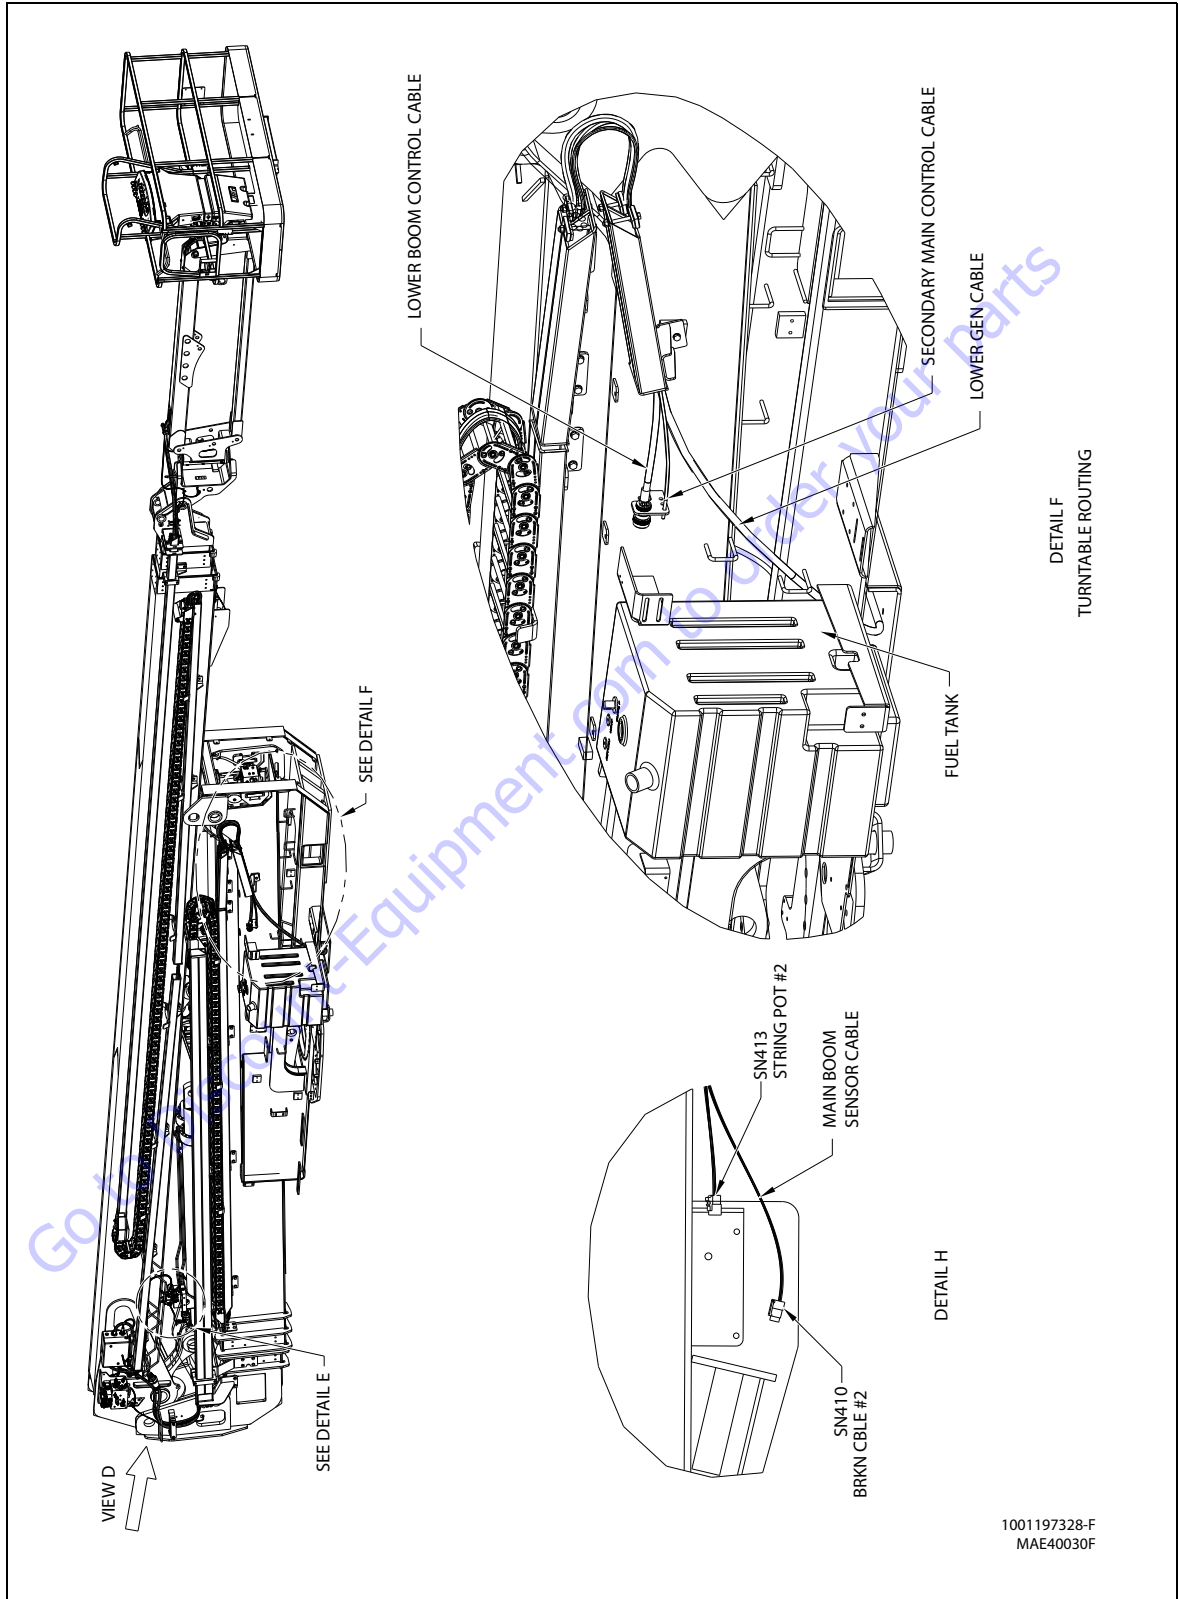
Boom Electrical Installation (SkyPower) - Sheet 2 of 6
